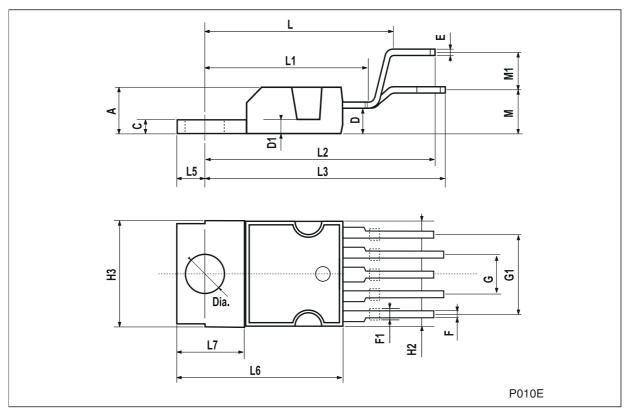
Drawing dimension tube for TO-220 Dual Gauge (mm.)
